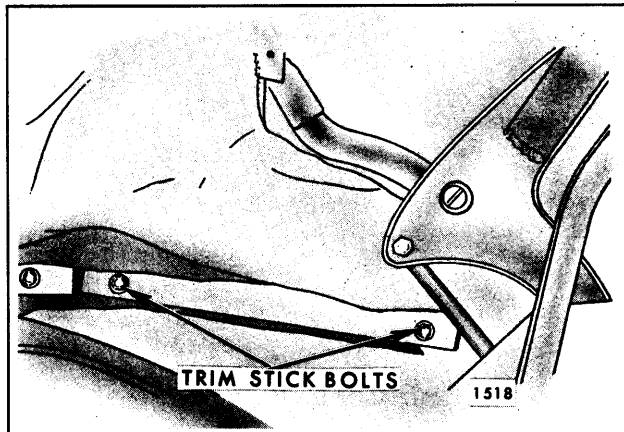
Quarter Trimstick "F & Z" Styles
